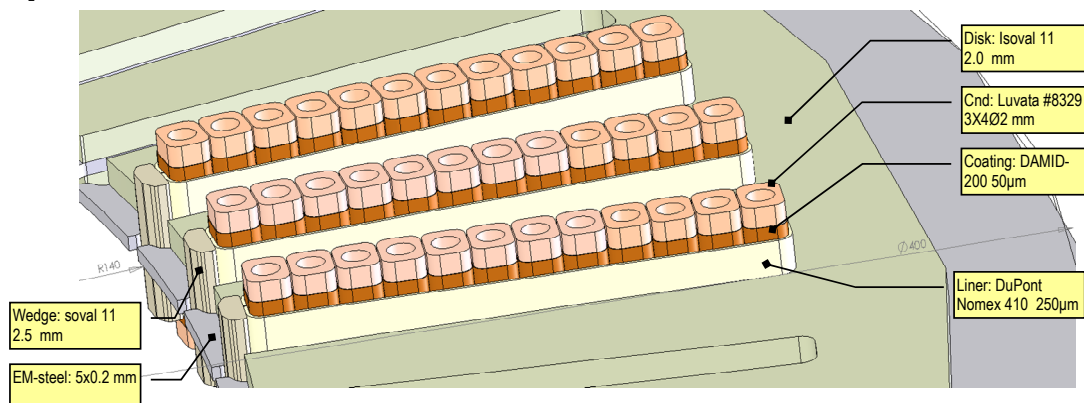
Detailed view of components assembled in 72-slot DW stator
